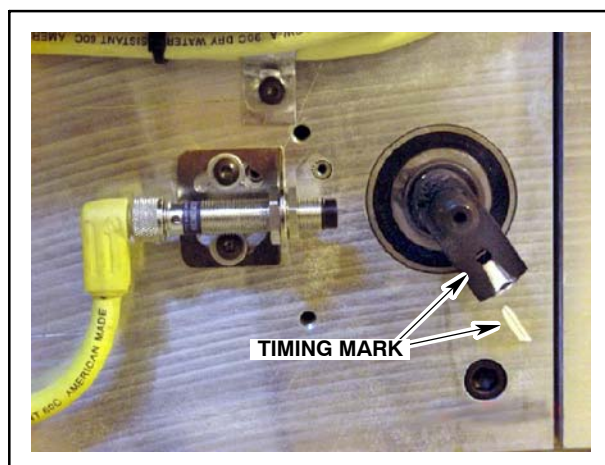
Align Machine Cycle Cam with Alignment Mark on the Machine (4 O'Clock)
